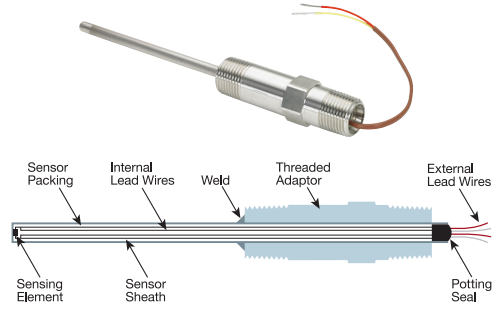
General Purpose Welded Adapter Style
